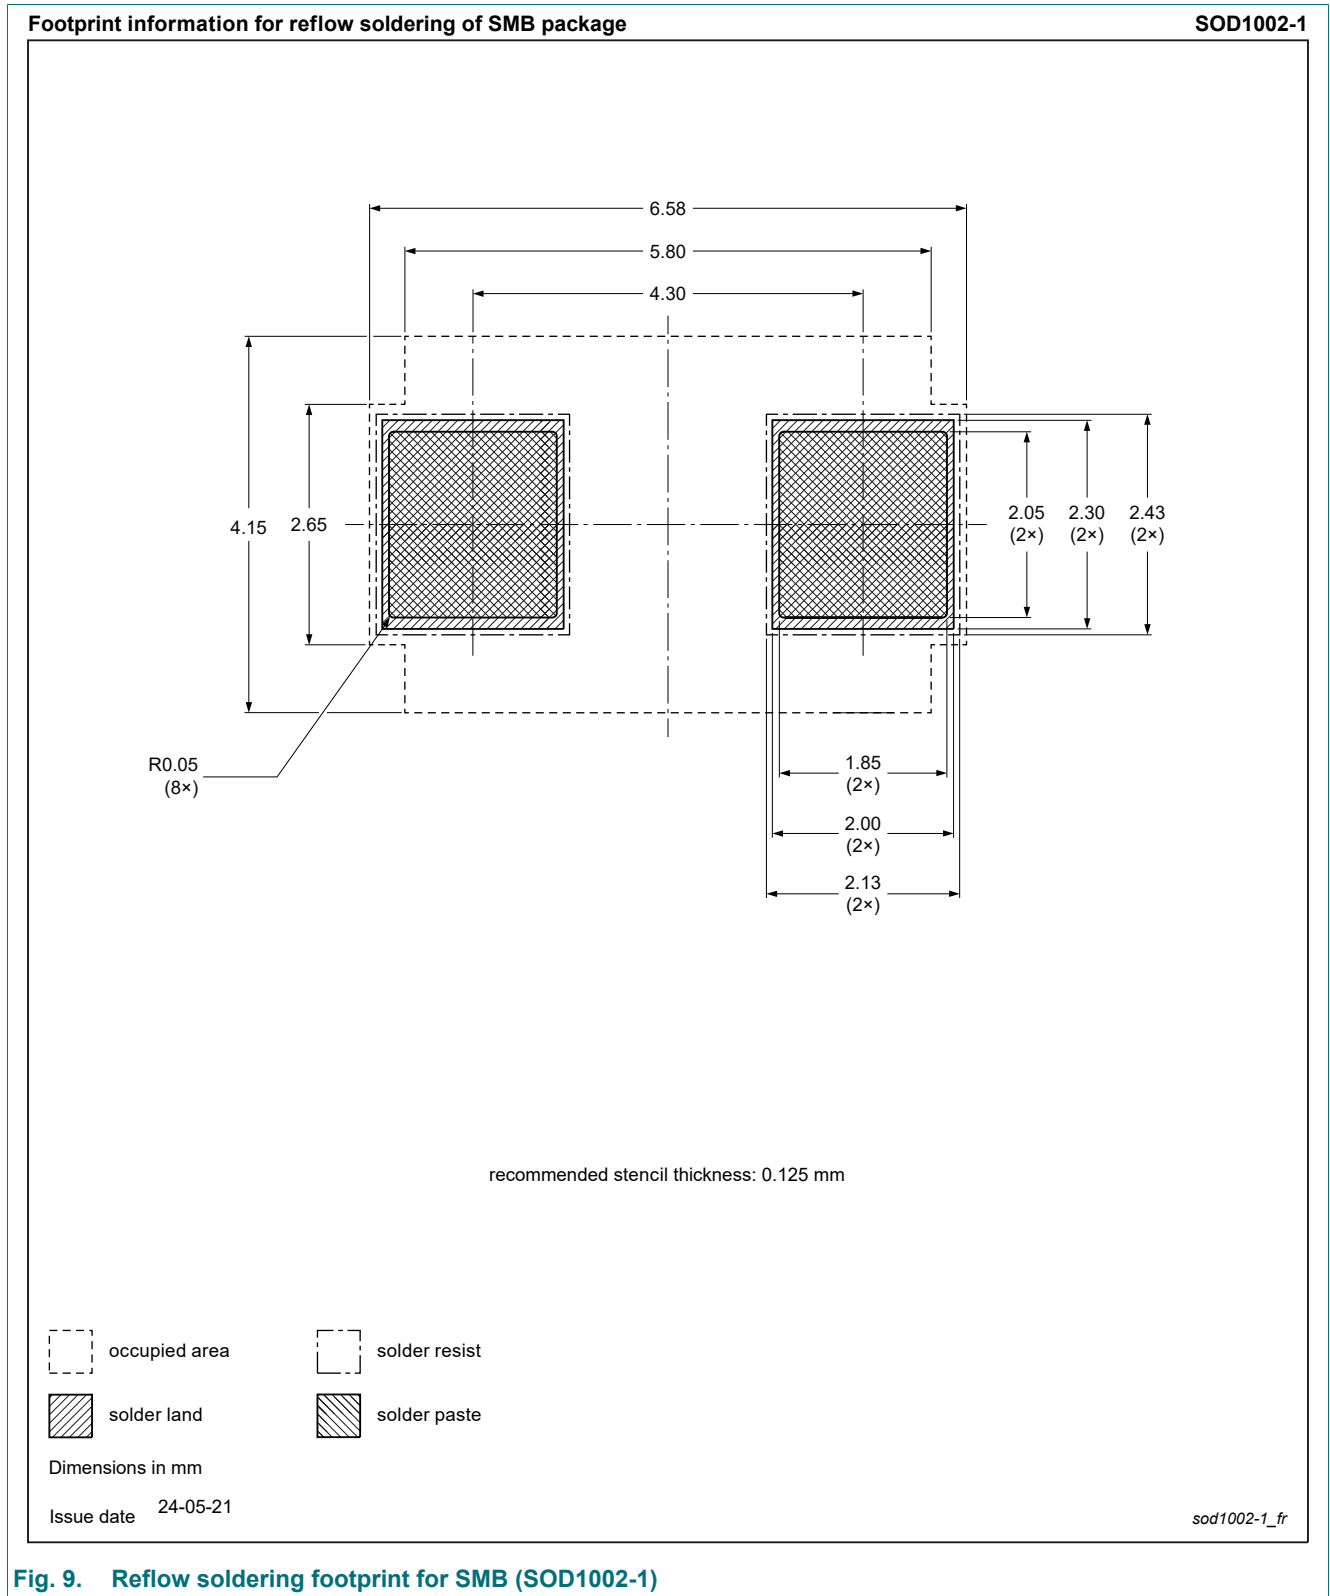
Reflow soldering footprint for SMB (SOD1002-1)
